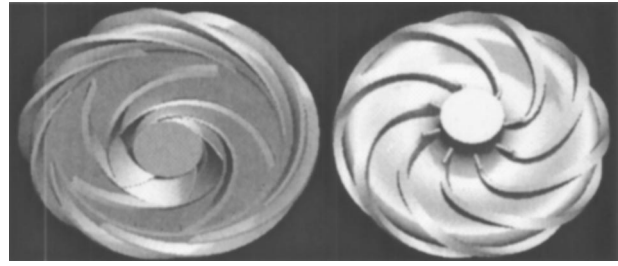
Geometry of the tested impeller and combined diffuser–return vane. Shroud removed for viewing.
